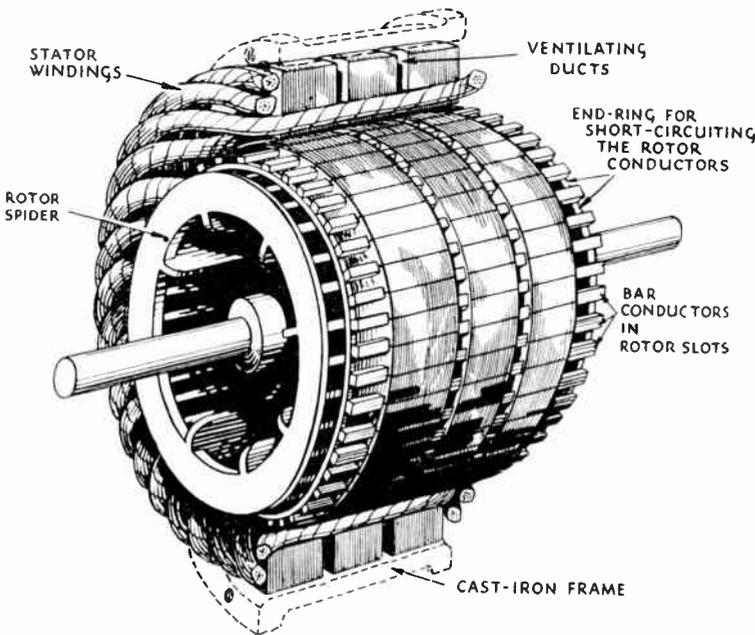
B.—GENERAL ARRANGEMENT OF STATOR AND ROTOR OF A SQUIRREL-CAGE MOTOR.
